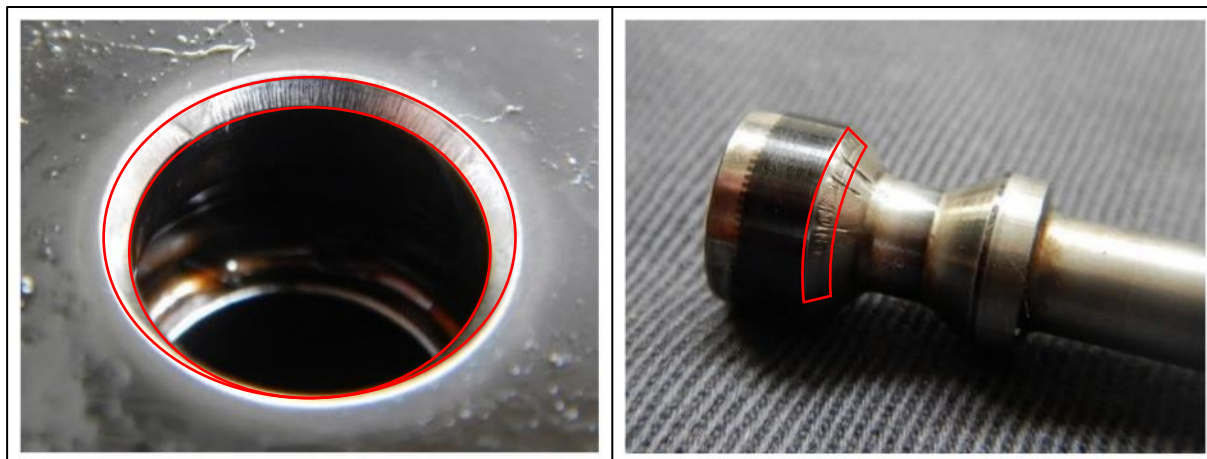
Traces of wear (e.g. grooves) on the valve seat and slider of an injection control valve belonging to an ICU of a RT-flex large diesel engine (sealing surfaces outlined in red)<sup>82</sup>
